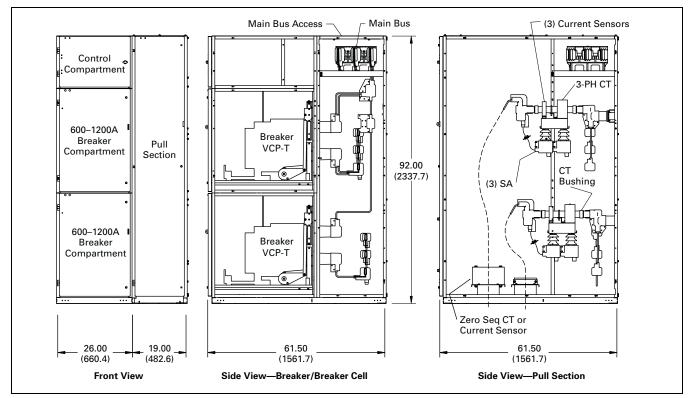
Typical Breaker/Breaker Unit and Pull Section, Cables Out the Bottom
